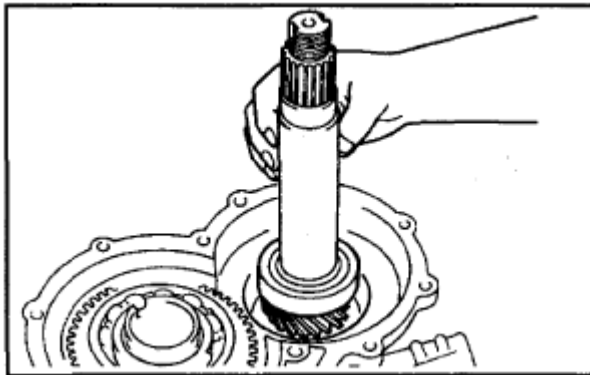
Removing Transfer Shaft & Taper Roller Bearing
